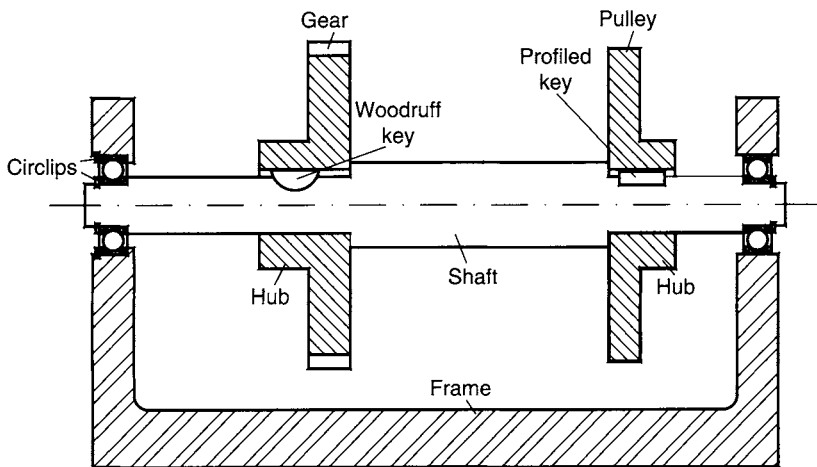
Typical shaft arrangement incorporating constant diameter sections and shoulders for locating added components.
